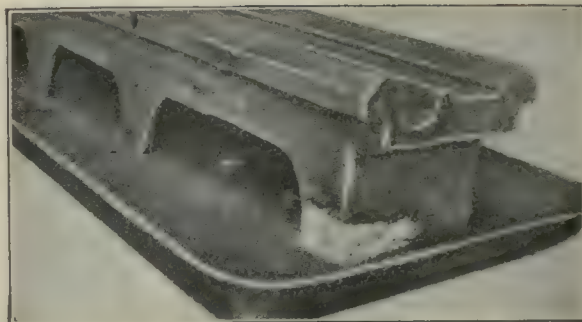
WELDED CRACK IN LATHE BED
